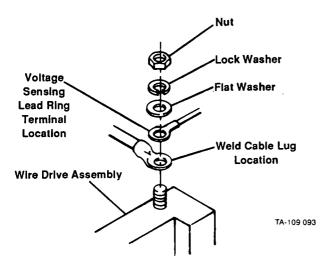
Voltage Sensing Connections At Wire Drive Assembly
